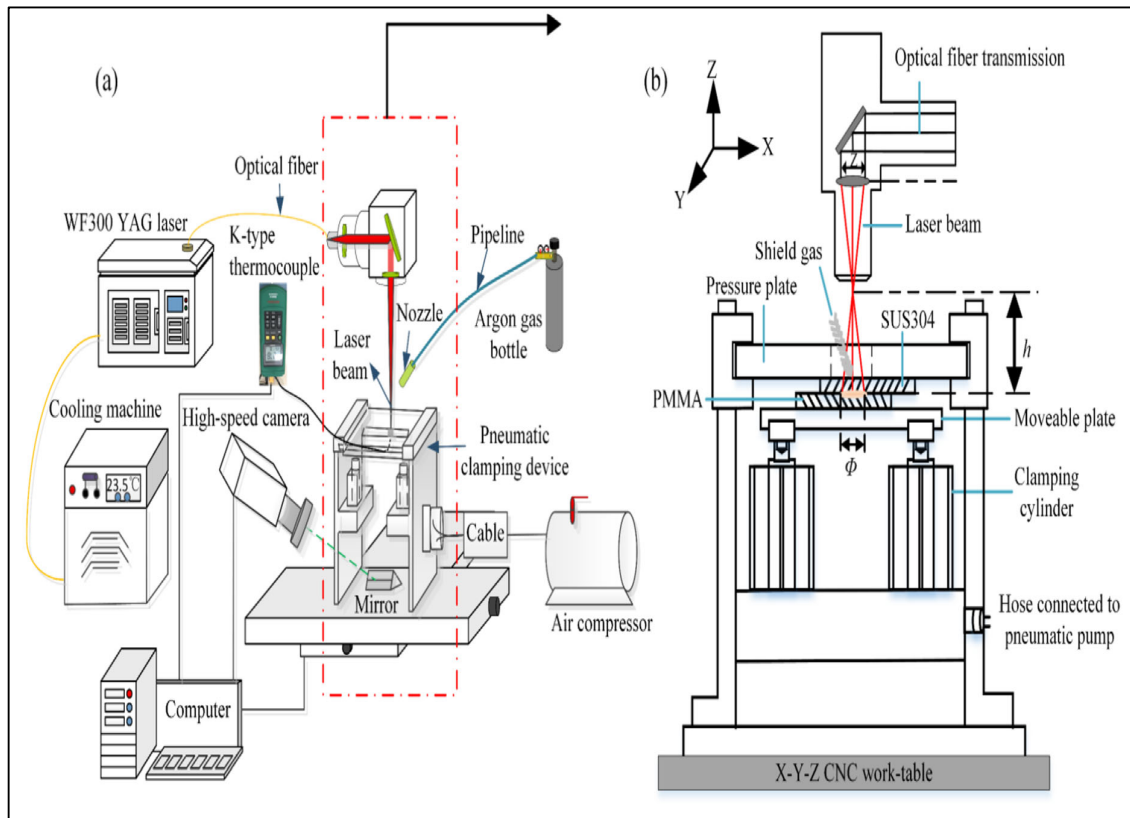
Schematic representation of laser welding setup [71]
